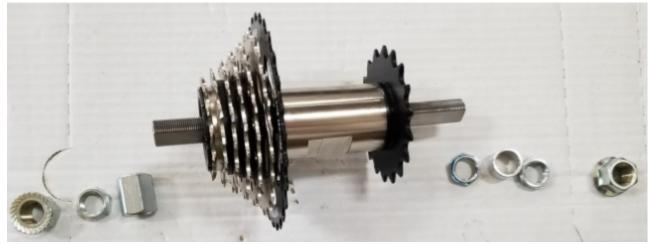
Transfer hub should use on freewheel side an outer jam nut, and then a wide nut up against bearing. The rear cog side will have an outer jam nut, spacer and inner jam nut against bearing.
